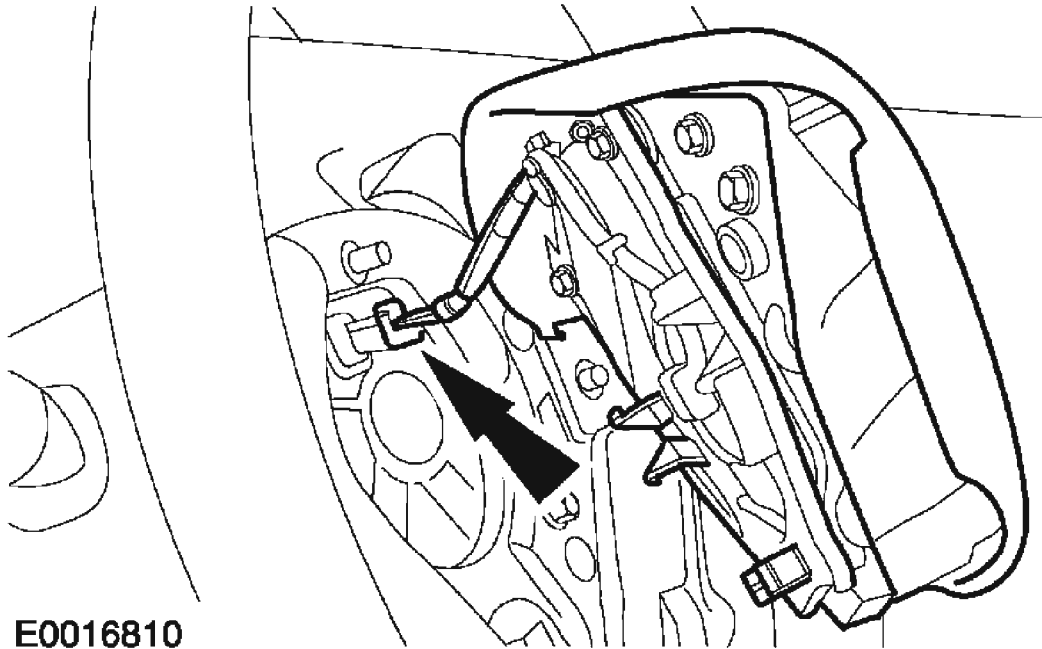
Connecting Driver Air Bag Module Electrical Connector
